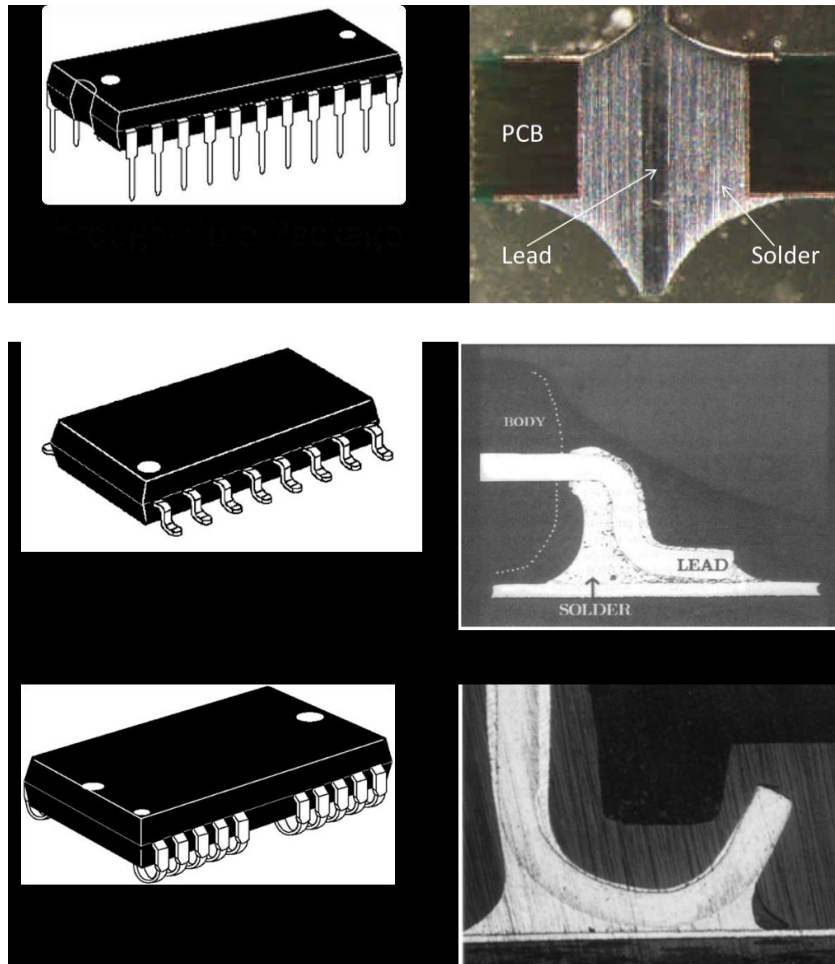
DIP, Gull Wing Component and J-Lead Component [2,5]
